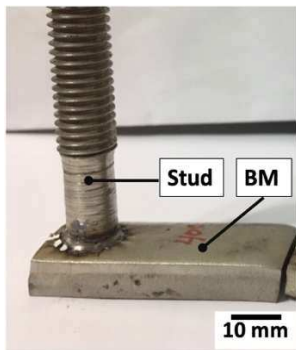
A part of welded AISI 316L stainless steel stud to BM
